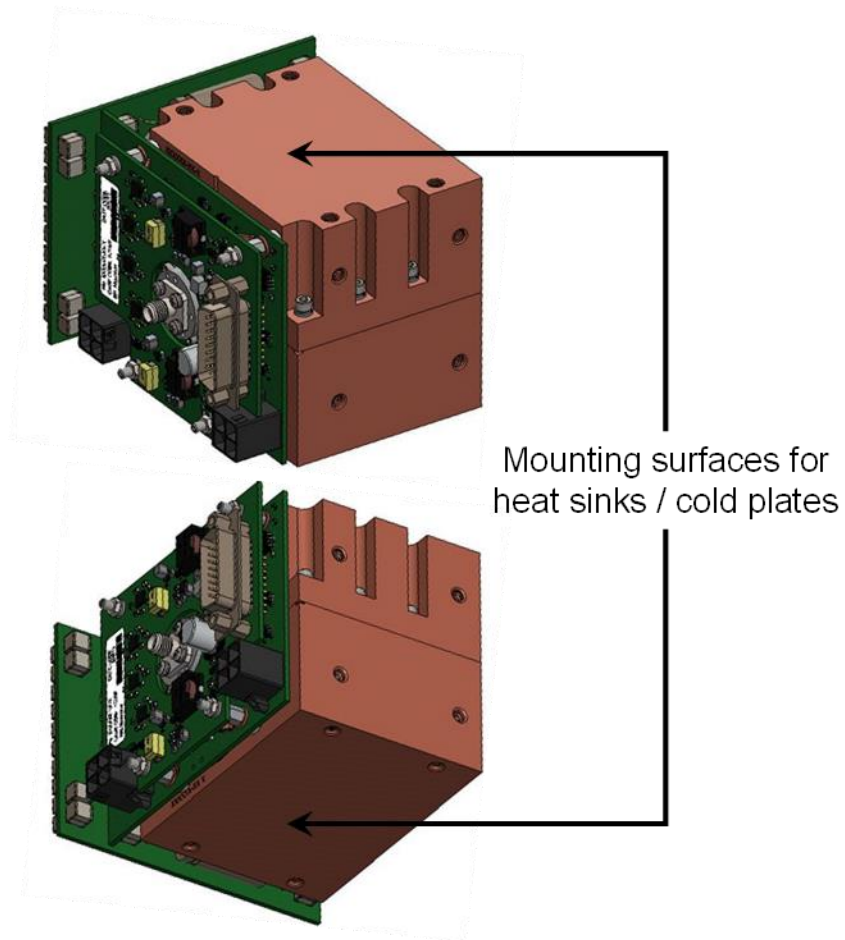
Heat sink mounting locations on typical Spatium clamp surfaces.
